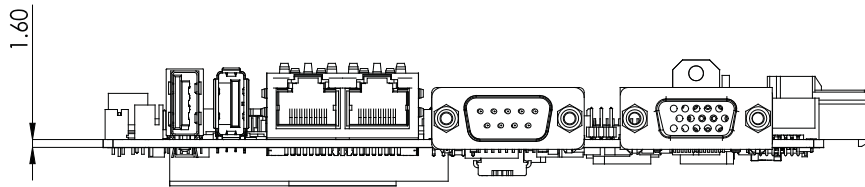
PCM-9365 Mechanical Drawing (Top Side)
